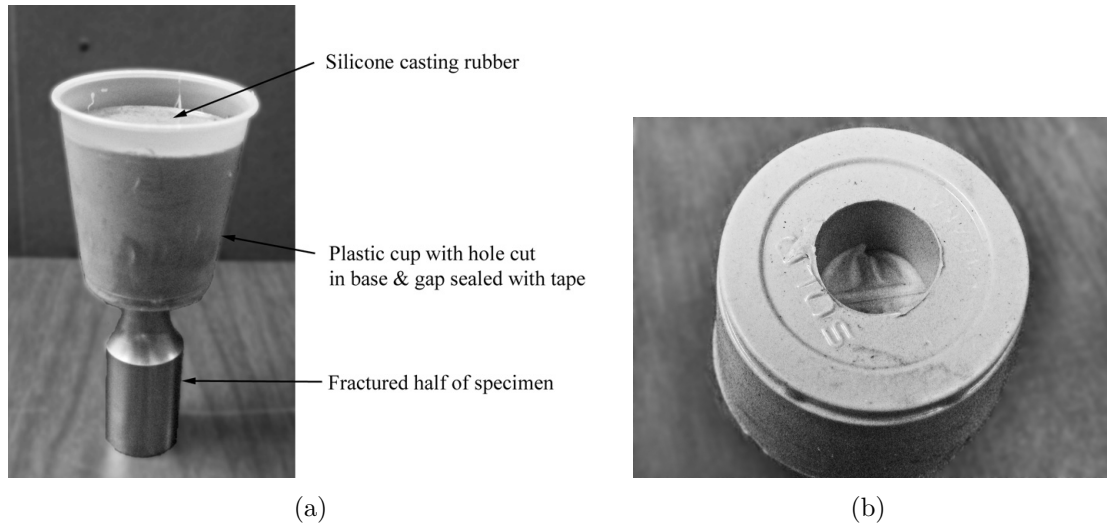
Half of each fractured specimen was used to create a reusable mold by immersing the gage section in a silicone compound (a), which upon curing contained a negative impression of the fracture surface (b).
